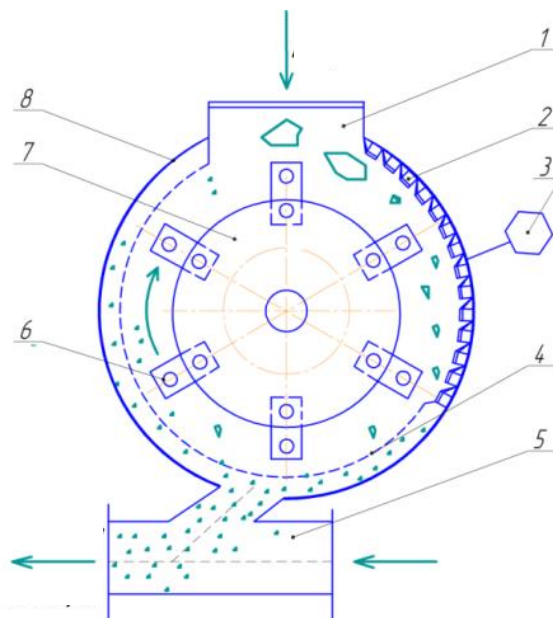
Functional diagram of hammer crusher: 1 - receiver, 2 - deck edge, 3 - regulating device, 4 - sieve (sieve), 5 - discharge device, 6 - hammer, 7 - disc rotor, 8 - housing.
